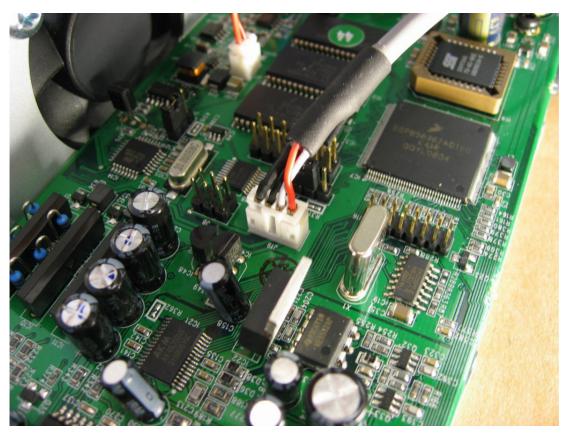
Mount the headphone cable to the main board as shown in the picture.
